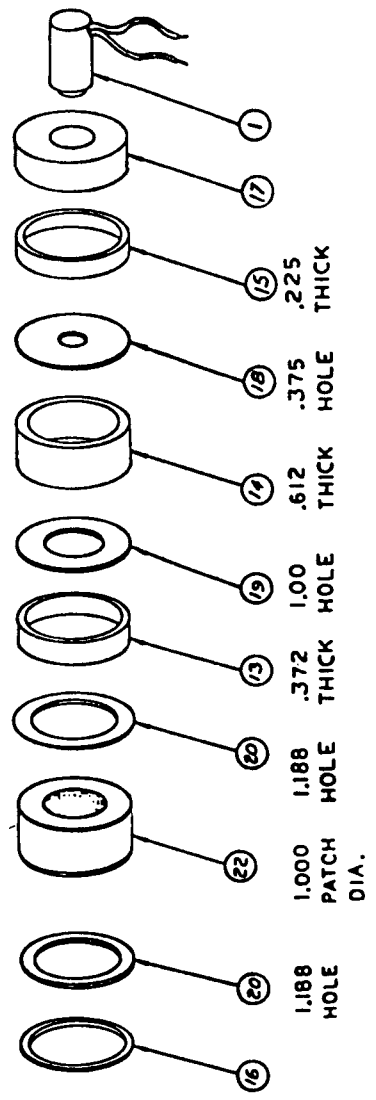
Part 3 (of 3). Light-scattering chamber assembly schematic.
